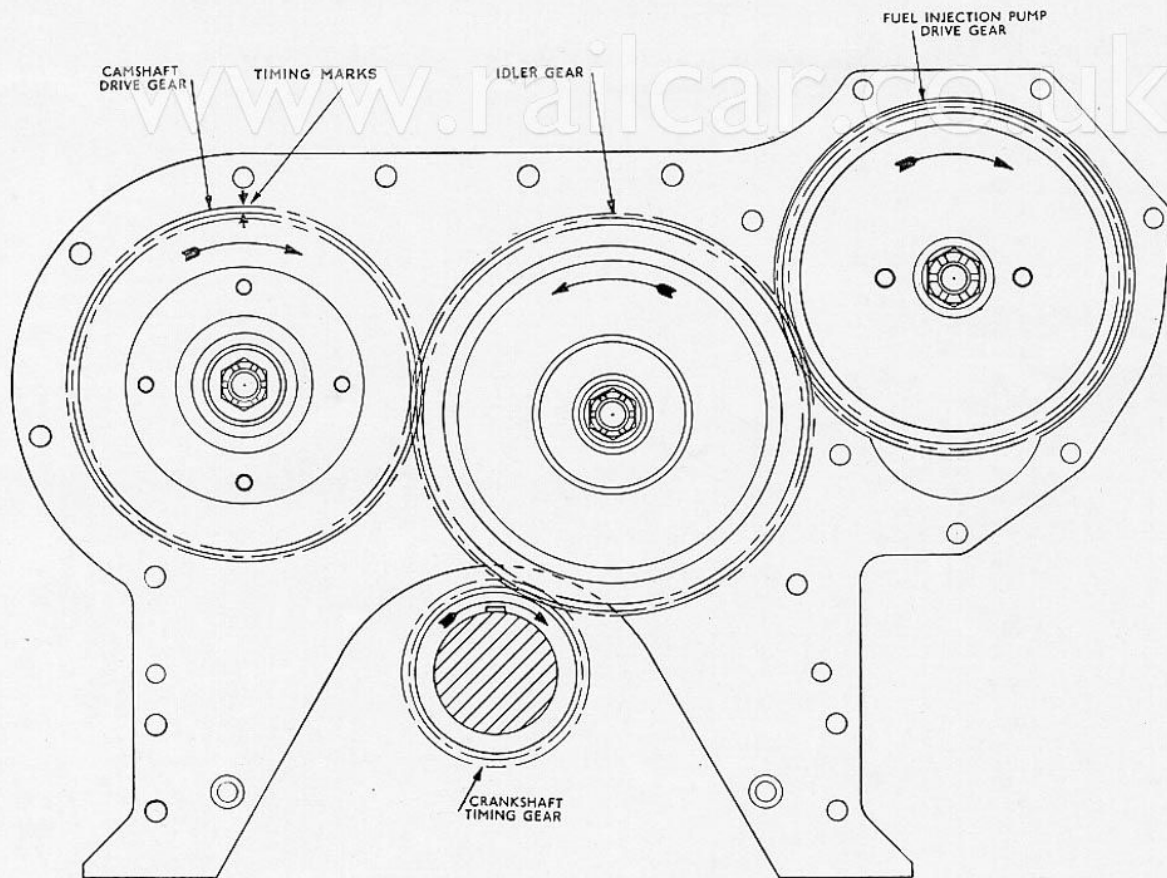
ARRANGEMENT OF TIMING GEARS (VERTICAL ENGINE)
